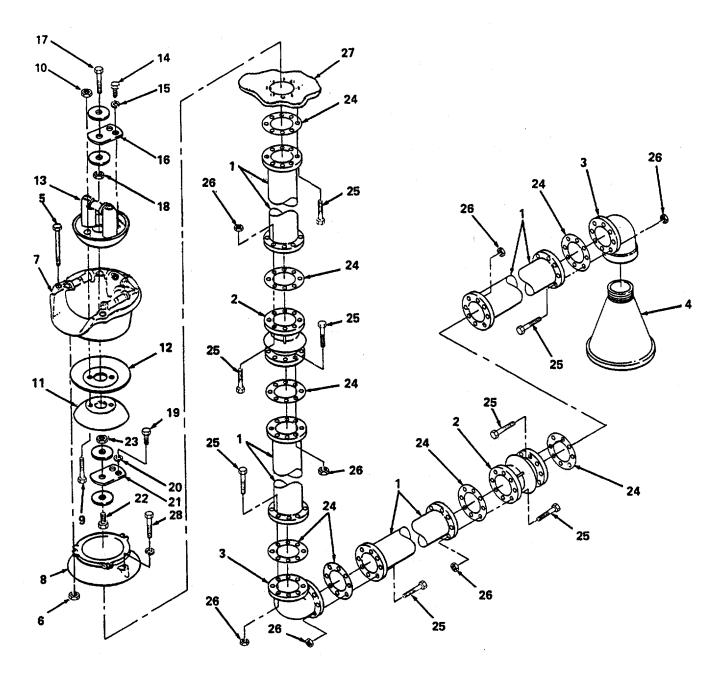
Bilge Pump and Piping Repair and Installation.
